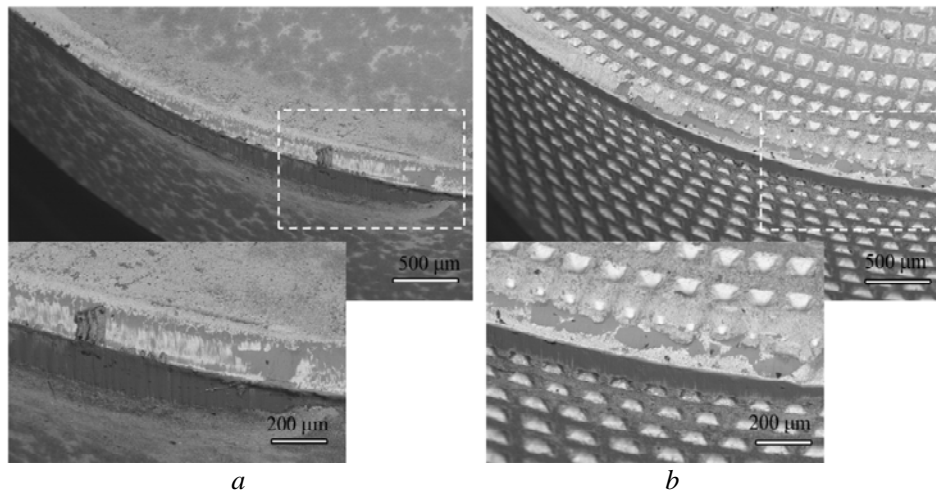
BSE images showing the appearance of the cutting edge after the tests with $v_c = 60$ m/min and $f = 0.1$ mm/rev with conventional insert (a) and surface-modified insert (b).
